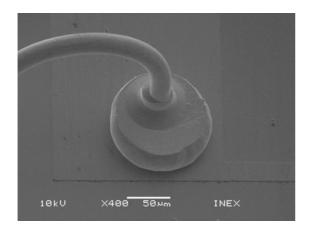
A magnified section of a wire bond to a FR4 ceramic board with pre-printed circuits. This image shows a gold wedge bond connection.
